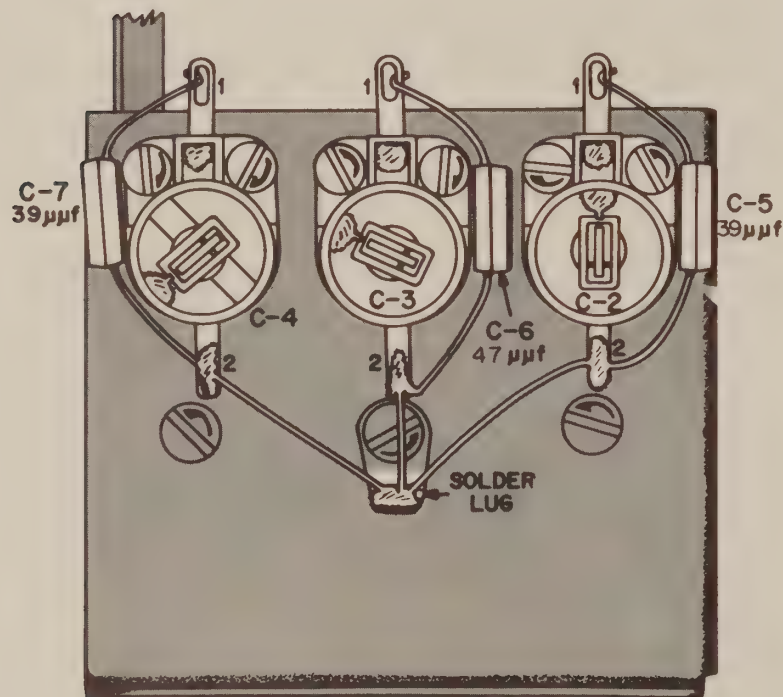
FIRST WIRING ON THE TUNING CHASSIS
